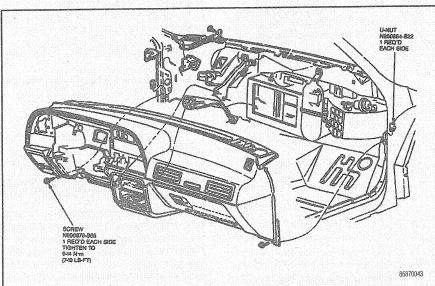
View of the instrument panel assembly and mounting bolt locations—typical
